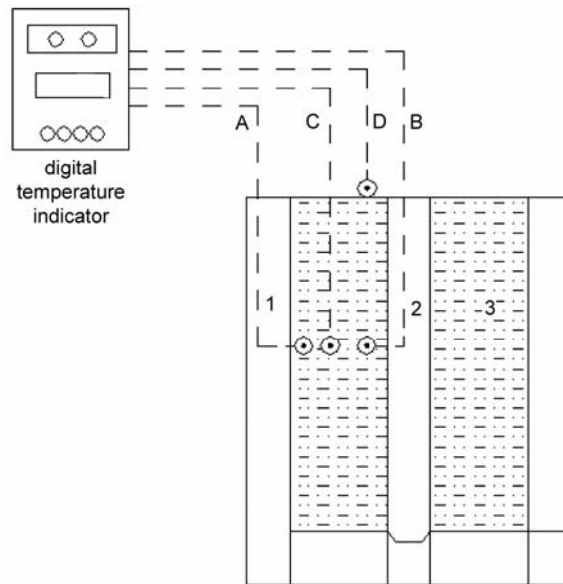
Experimental setup and thermocouple locations: A – thermocouple placed at the molten metal–mould interface, B – thermocouple placed at the molten metal–core interface, C – thermocouple placed at the centre of the molten metal, D – thermocouple placed at the surface of the molten metal; 1 – CO<sub>2</sub>–sand mould, 2 – CO<sub>2</sub>–sand core, 3 – molten metal
